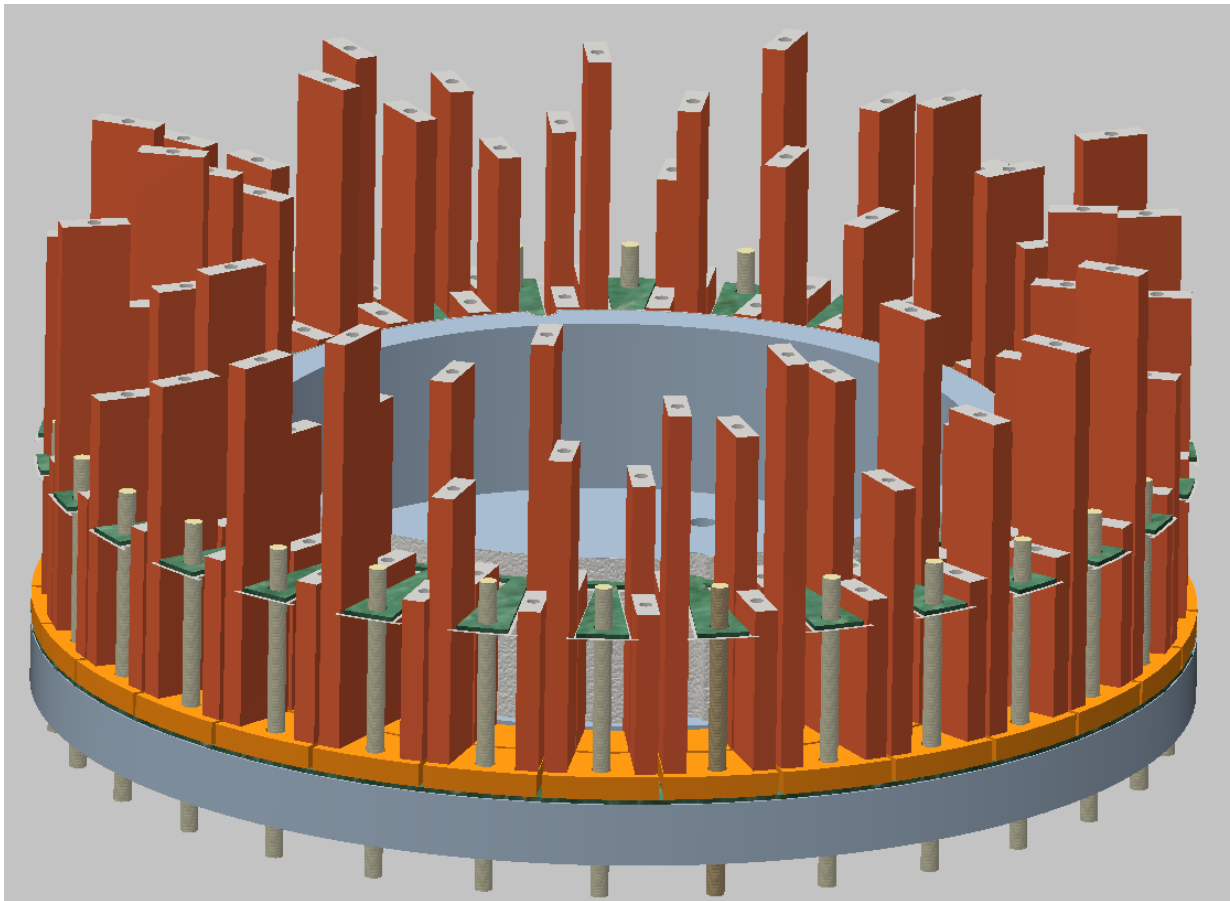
Same as Figure 6.9, but with copper bars placed into position. An additional FR4 ring is inserted, which will rest on top of the end-turn pieces. Machine dimensions as described in Appendix B.
